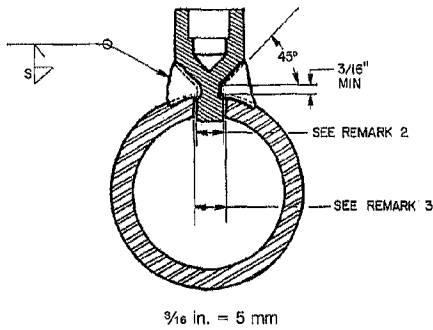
Fillet Reinforced Internal Root Conn, Single Bevel, Welded With Square End Backing Ring
